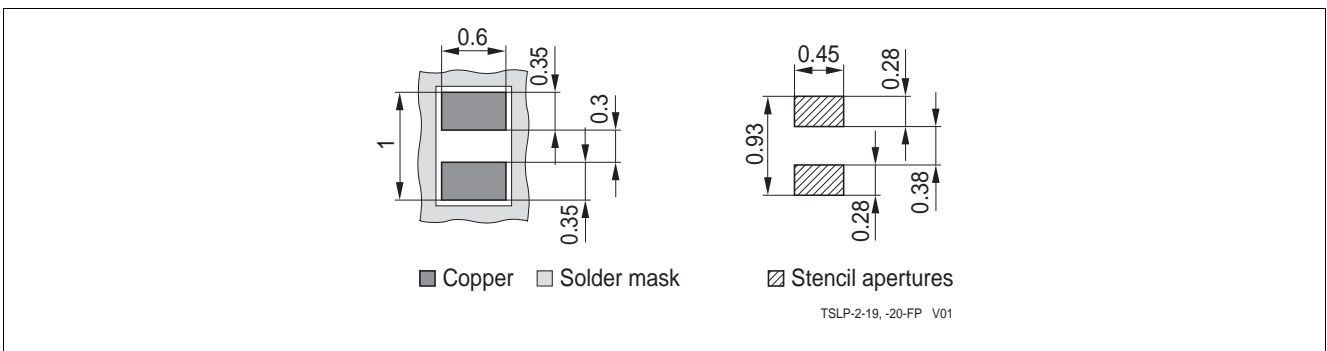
TSLP-2-20 Footprint (dimension in mm)
